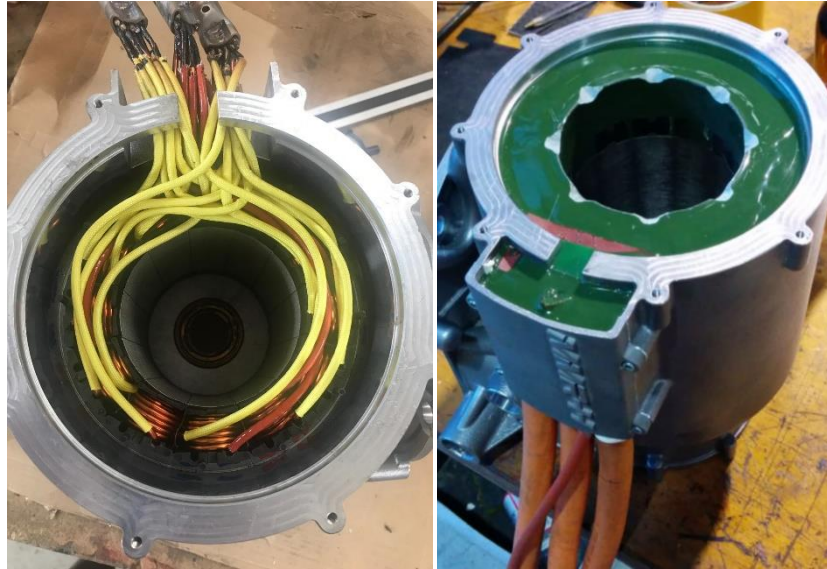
Side view of the assembly of the EM housing: detail of wiring output and PCV valve.
